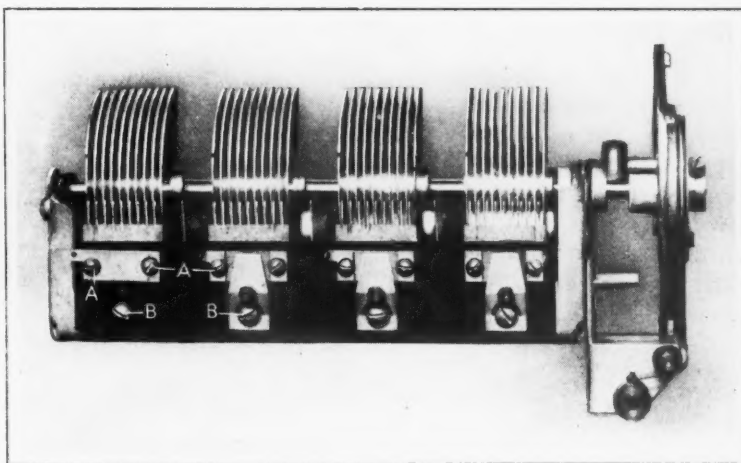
Radio Condenser Assembly in which Lock-washers are Used
